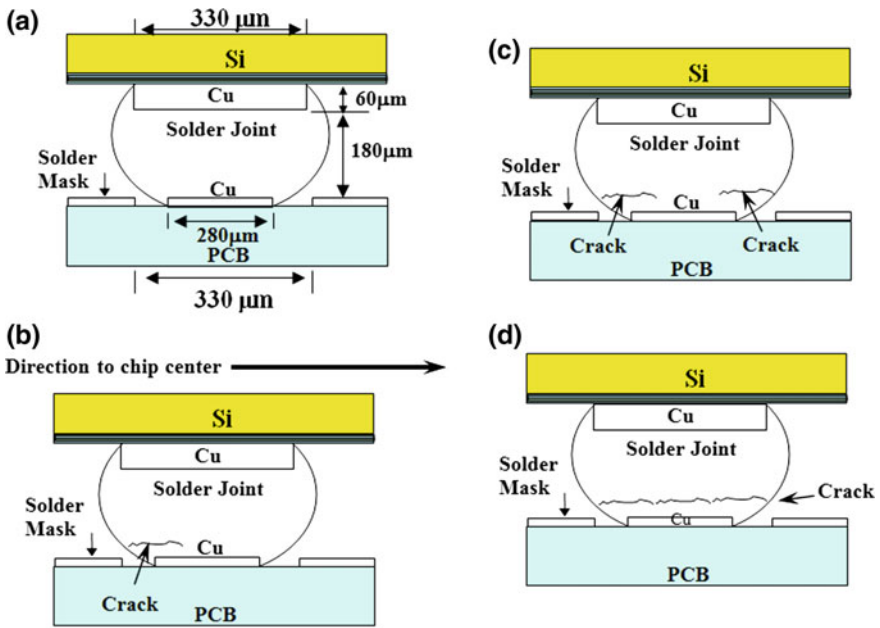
Schematic of the corner solder joint at different stages. a No obvious crack when temperature cycles are less than 800. b Crack initiates from the outer edge. c Crack begins from the inner edge. d Cracks grow through the whole solder joint
